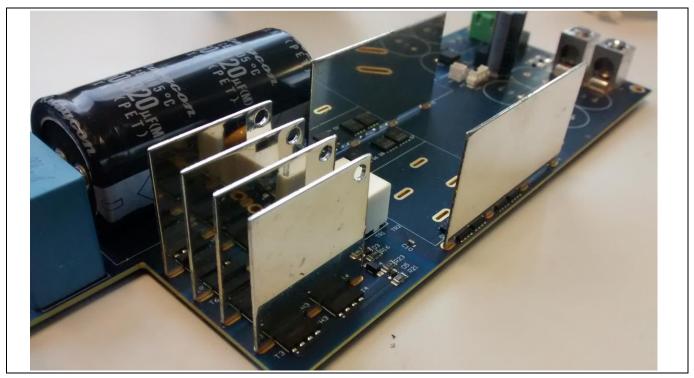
Heatsinks for HV bridge devices and LV secondary devices in a partially assembled PSFB 3300 W converter board
